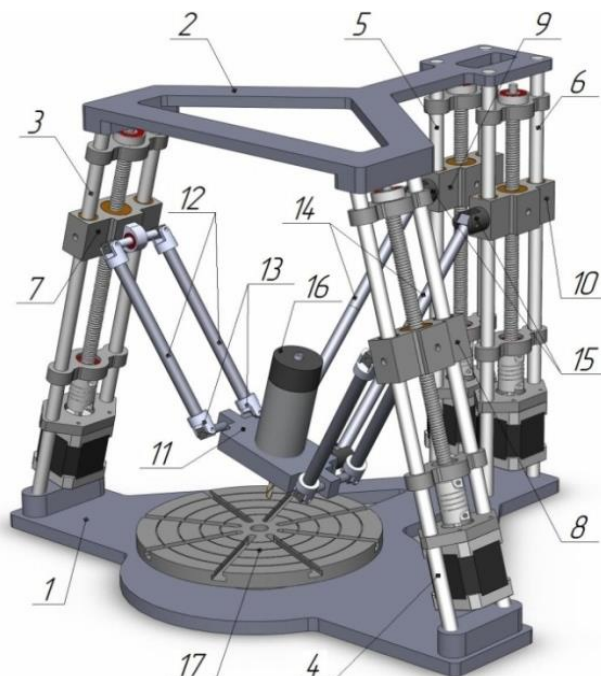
The multiaxis milling machine with PKM (3D model) and include racks at an angle / Багатокоординатний фрезерний верстат з МПС (3D модель) з розміщенням стійок під кутом
